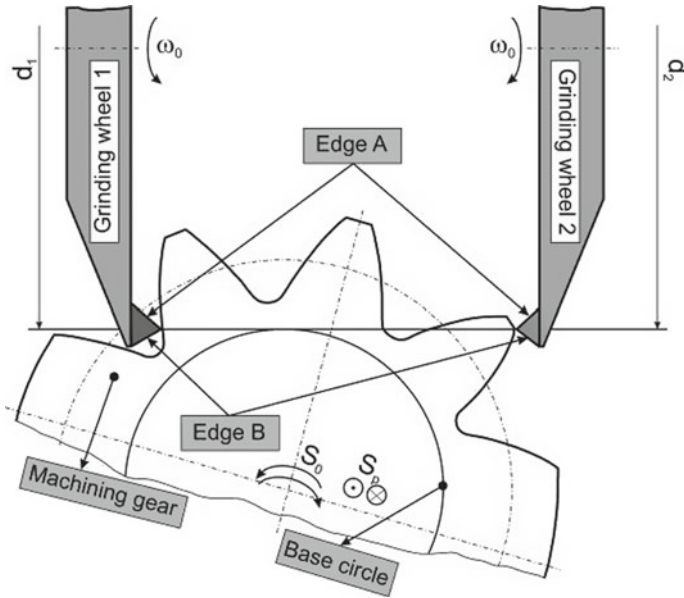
Scheme of gear grinding by the zero method ensuring the same cutting conditions when the tools enter and exit the machined tooth slot
